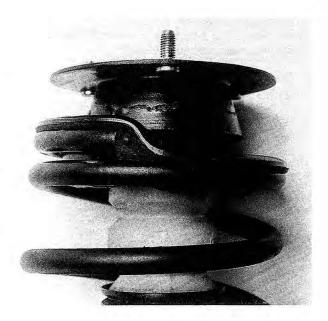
Correct assembly of coil spring, rubber ring, and spring retainer.
